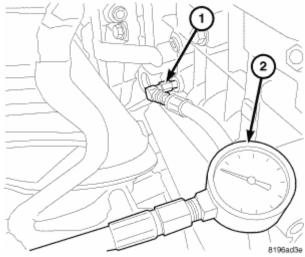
OIL PRESSURE GAUGE Courtesy of CHRYSLER LLC
